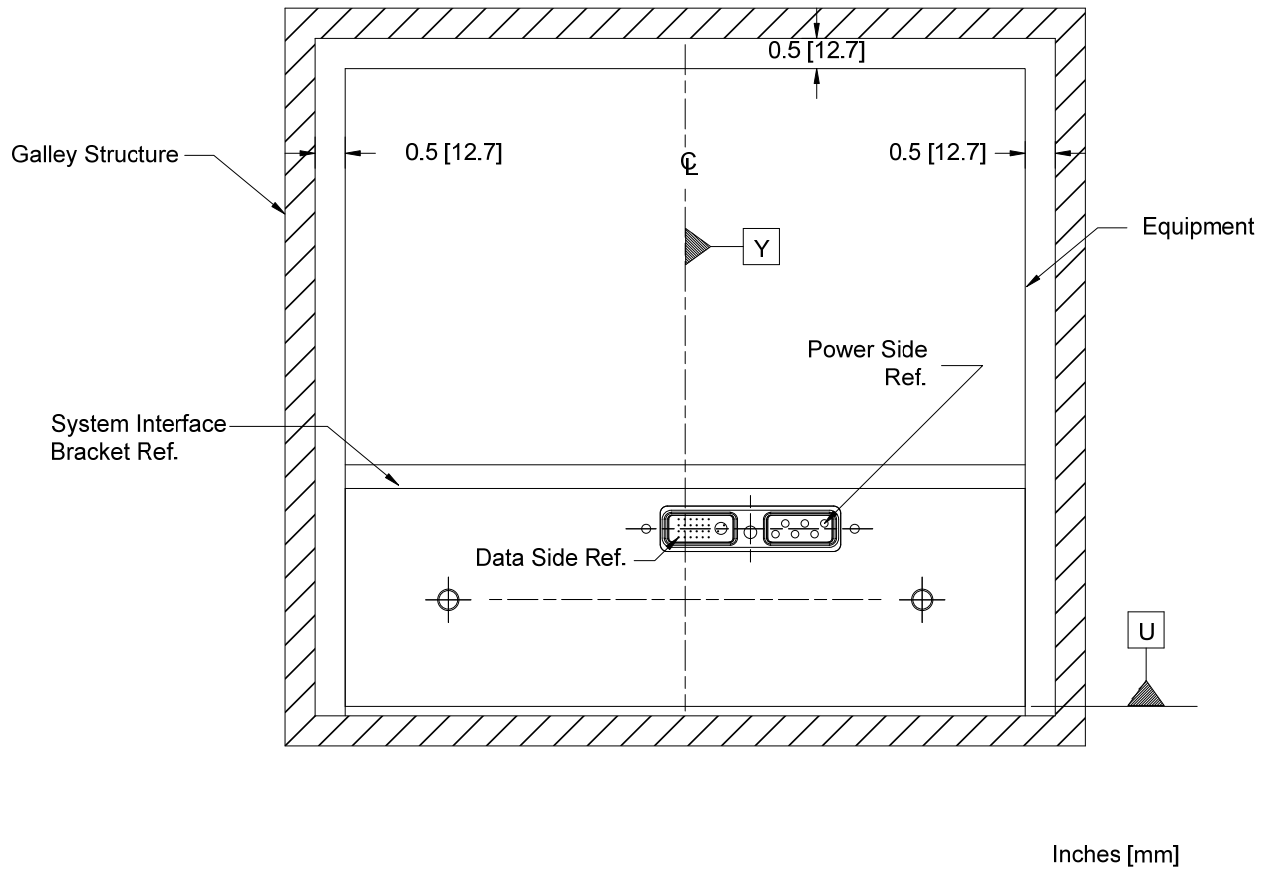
A – GAIN Size 4 Compartment and Equipment Installation Details
